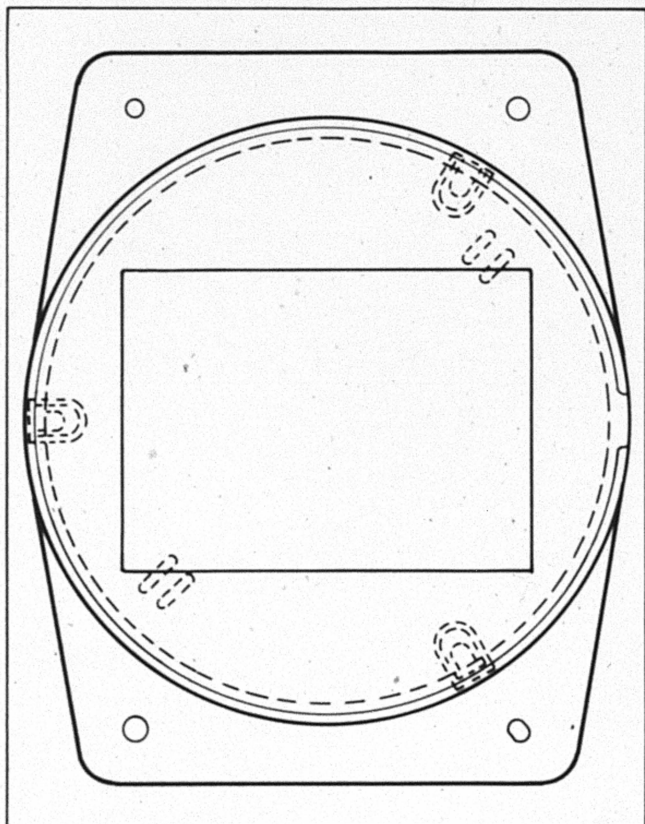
LIQUID COOLED CRT AND JACKET ASSEMBLY
